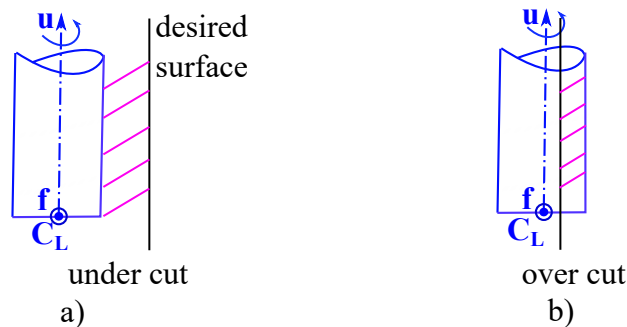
Impact of tool location error on the effective cutting errors of 3-axis flank milling
